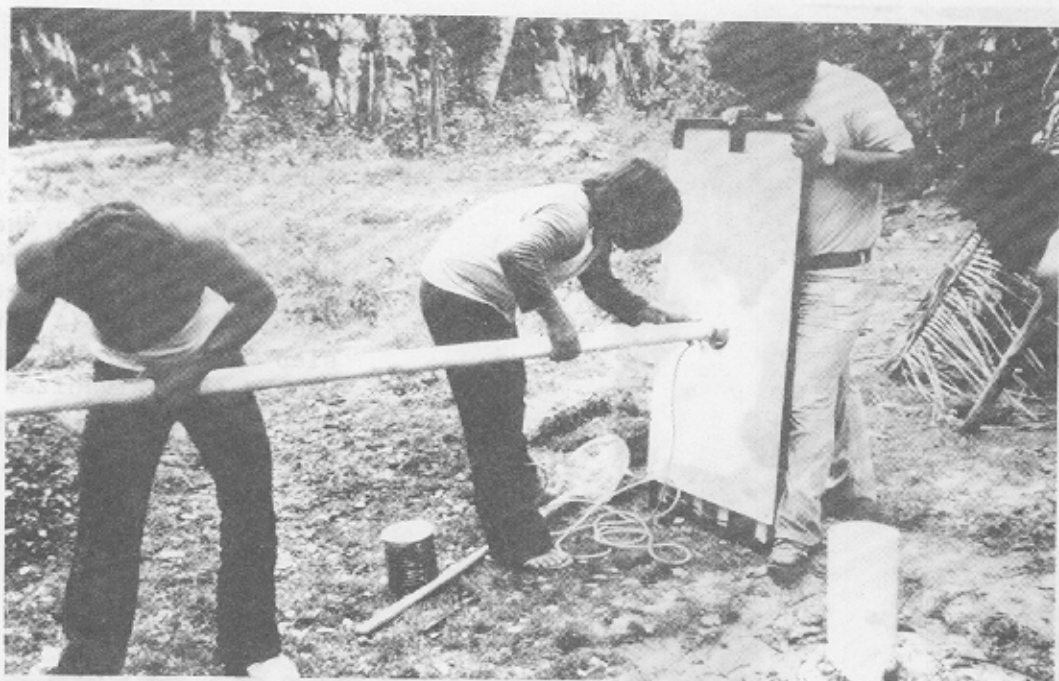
Attaching the galvanized pipe. Screw the 10 foot long piece of 2-inch galvanized pipe into the flange (located on the back of the solar panel assembly) until it is snug.
